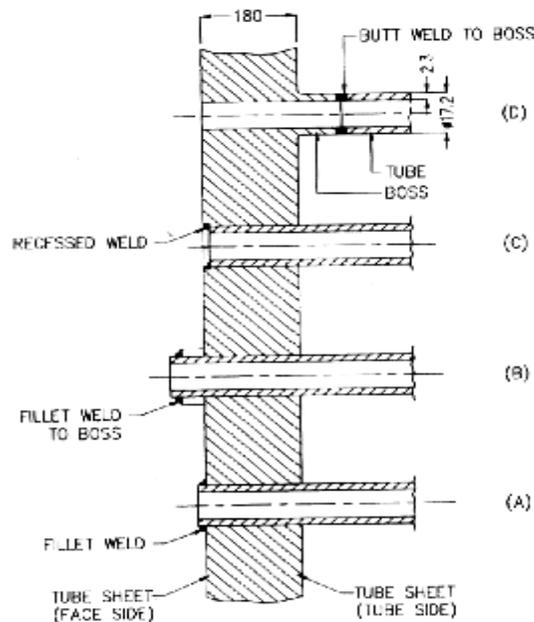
Typical joint configurations of tube to tubesheet welds
